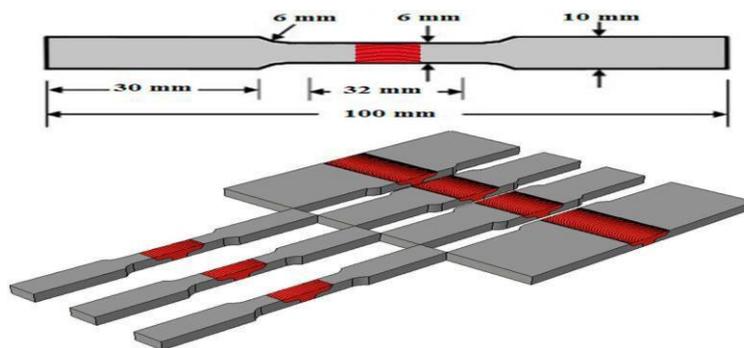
Schematic view of welded sheets and cut tensile test samples.
